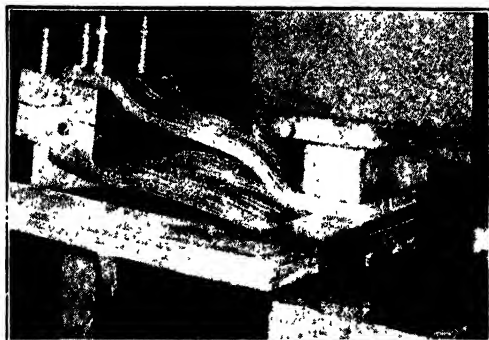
Four braid groups in clips being silver-brazed simultaneously to a fabricated conductor. Carbon blocks are used for resistance heating.
